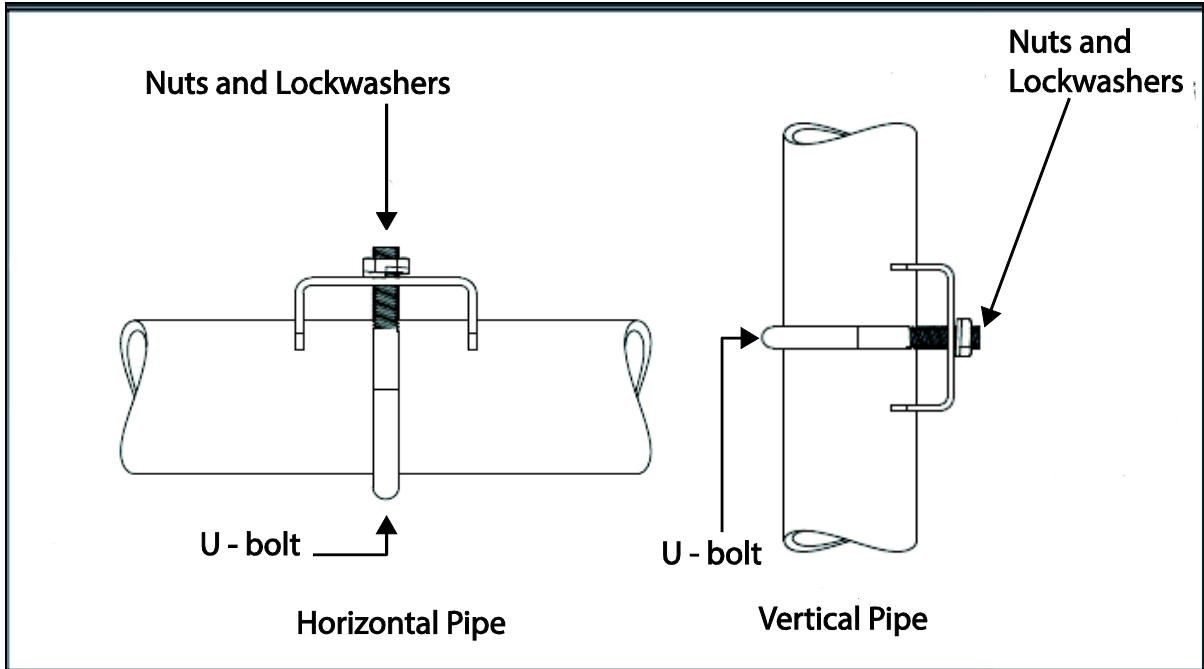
Pipe Mounting Bracket Secured to a Horizontal or Vertical Pipe
